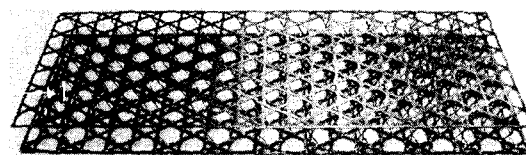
Kagomé-truss sandwich plate fabricated for 3-point bending test
